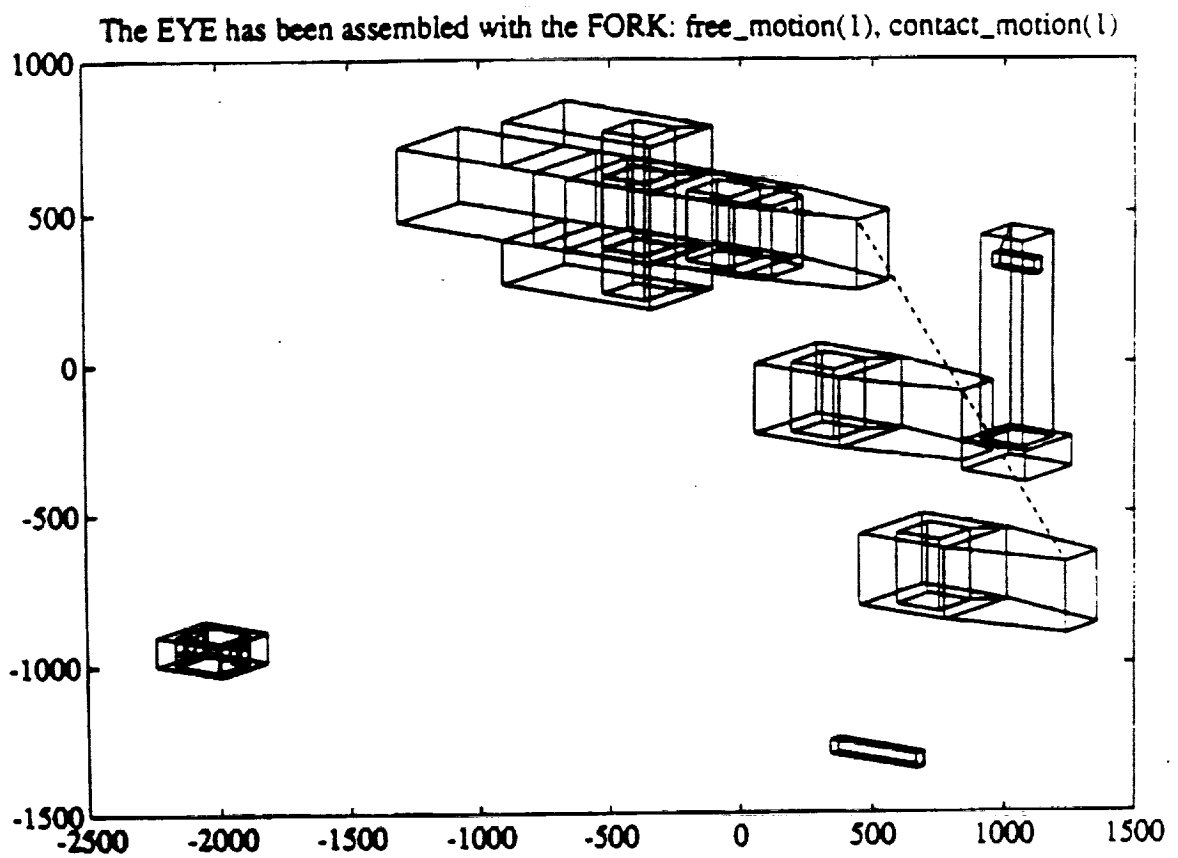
Assembly Path Planning for a Knuckle Joint Assembly, using the 3D WC Algorithm
